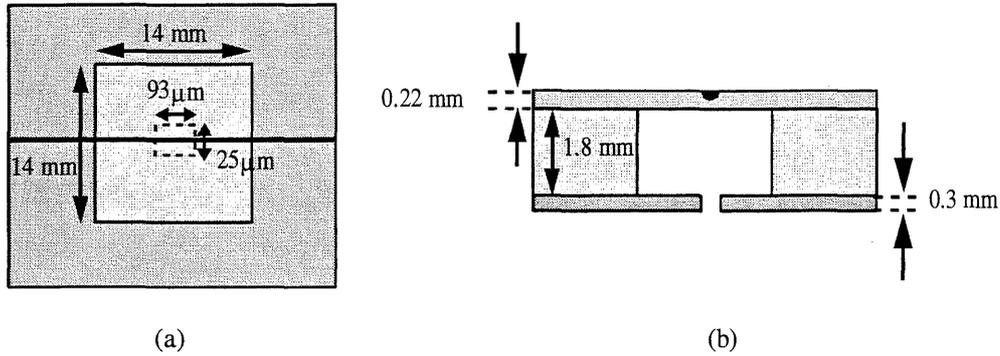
(a) Top and (b) cross-sectional views of the fabricated sensor and actual dimensions.
